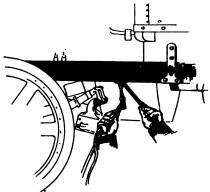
IT IS SOMETIMES NECES-SARY TO DO OVERHEAD WELDING
